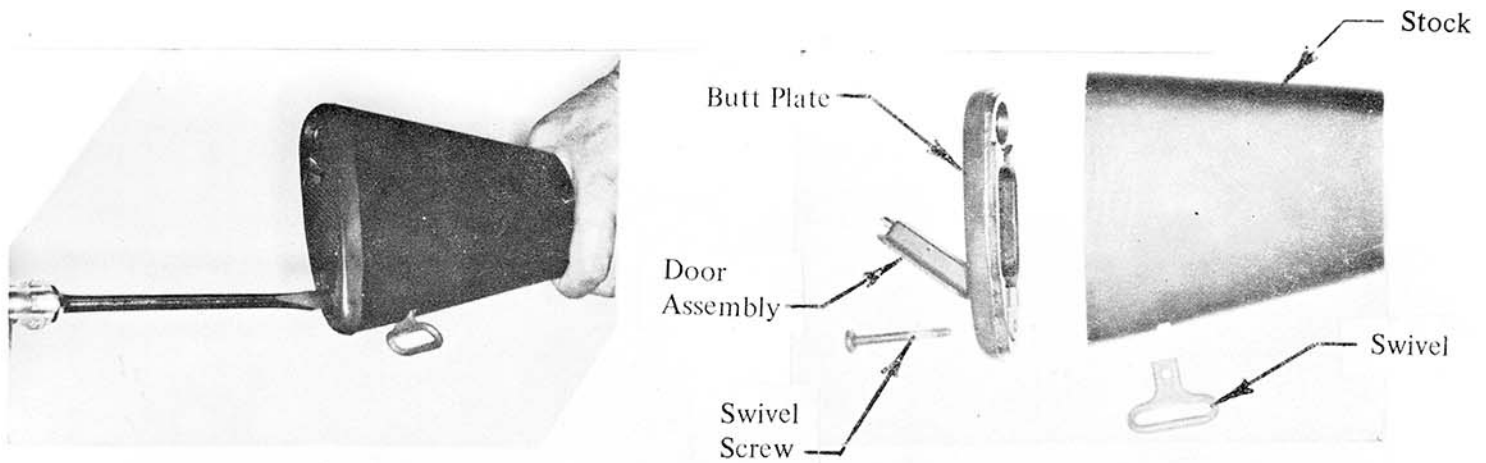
BUTTSTOCK STORAGE ASSEMBLY PARTS
